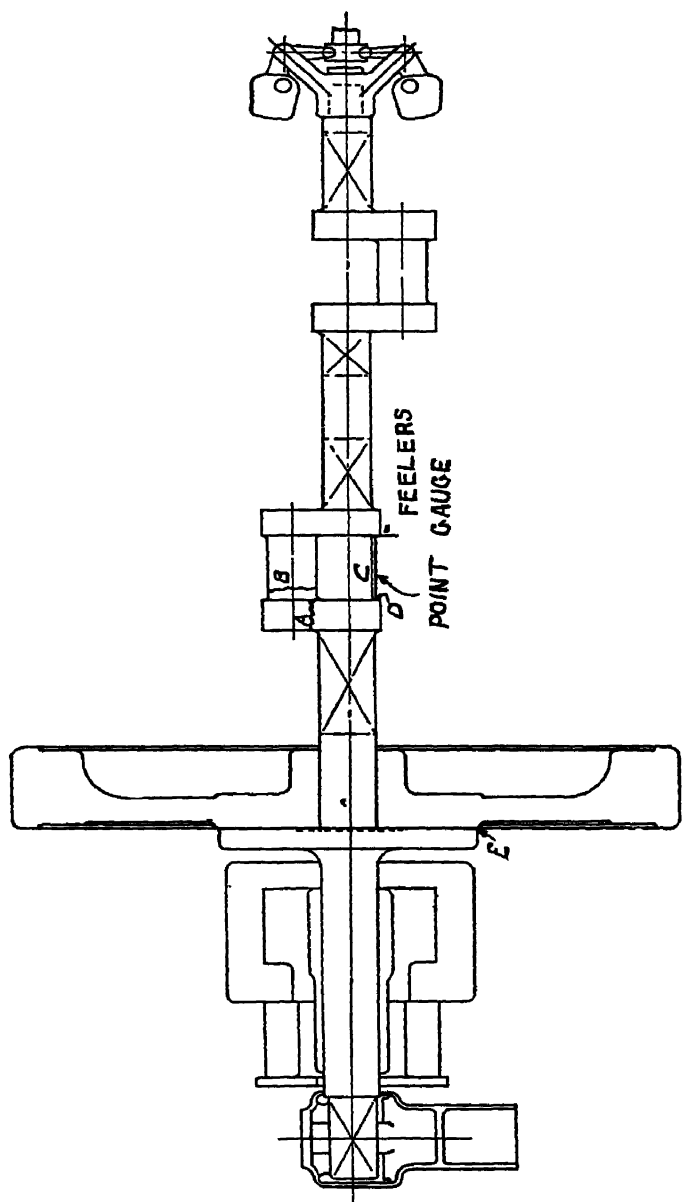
ALIGNMENT OF CRANKSHAFT OF HIGH-SPEED ENGINE
